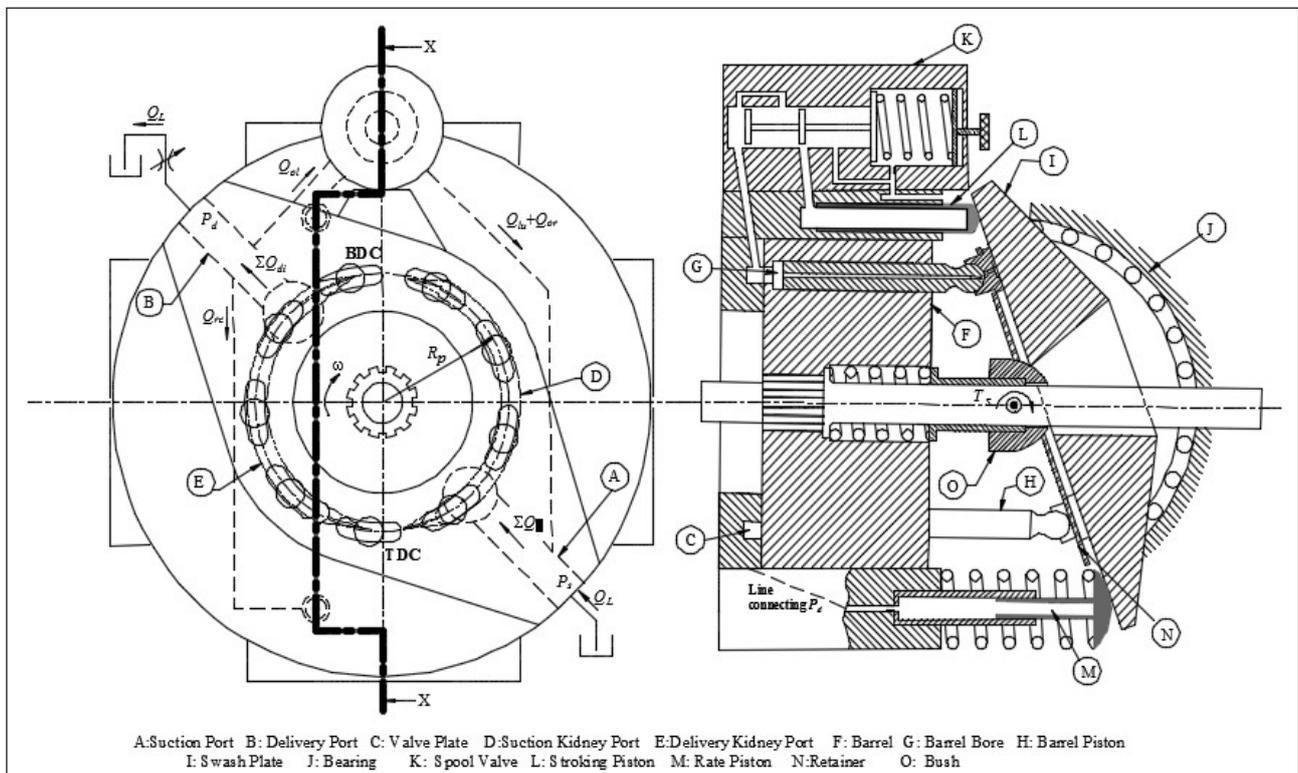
Schematic of a swash-plate axial piston pump with pressure compensator.
